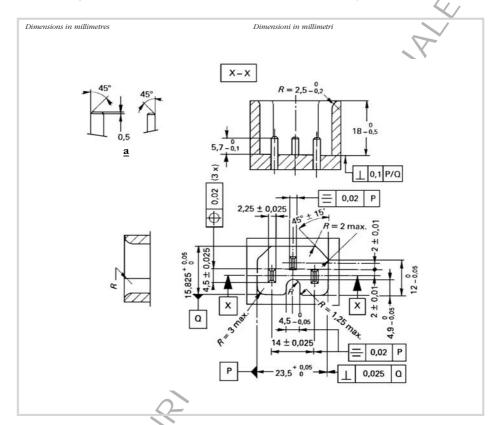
J "GO" gauge for connectors to standard sheet C15 Calibro PASSA per prese di connettore secondo il fo-(see 9.1)
